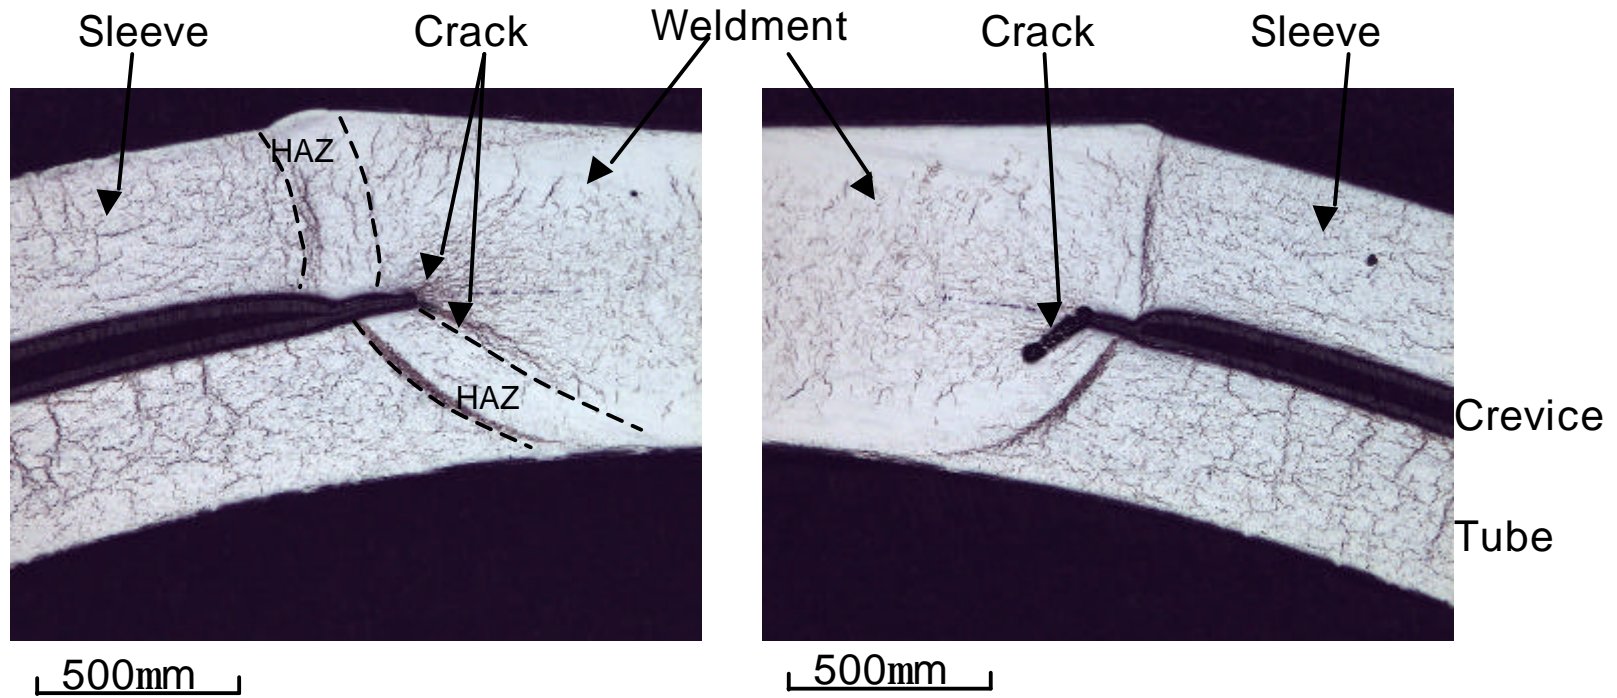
Cross-sectional microstructures of the the spot welding for 17x17 design after corrosion in 700 ppm LiOH at 360°C for 6 days, showing hydride distribution and cracks
